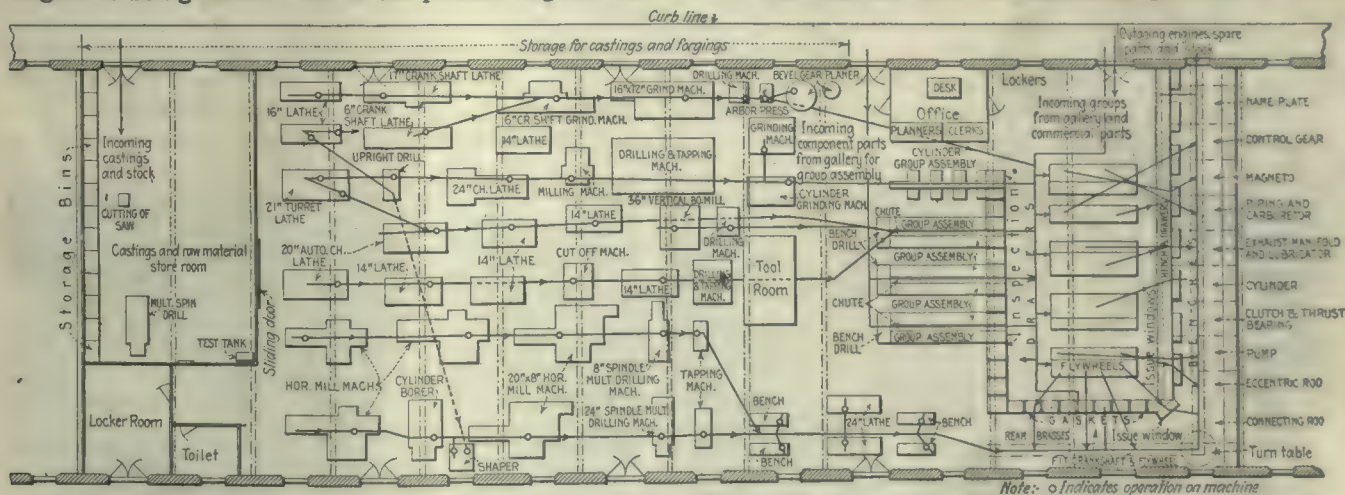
LAYOUT OF GAS ENGINE PLANT
